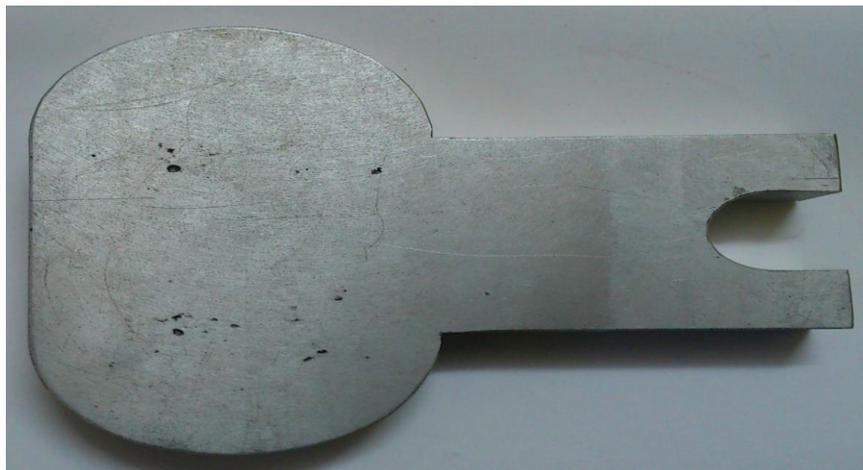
casting with feeder of diameter 50mm shows defect after machining
